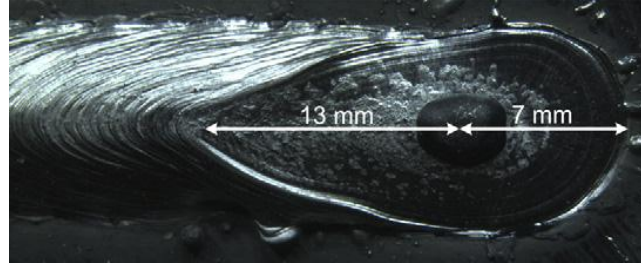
Actual weld pool length: front and rear sections from [127]
